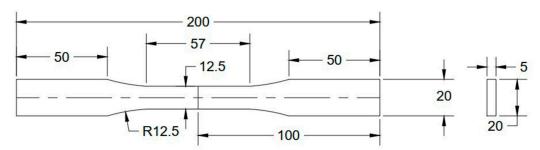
ASTM Standard (E8/E8M-13a) for weld specimen design (all dimensions are in mm).
